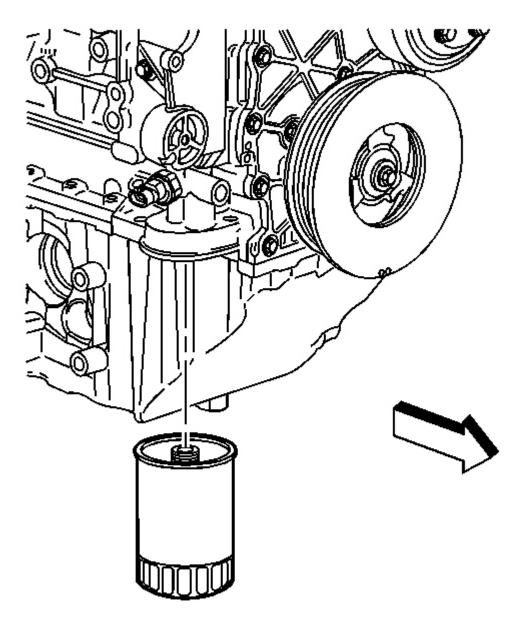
View Of Oil Filter Courtesy of GENERAL MOTORS CORP.
